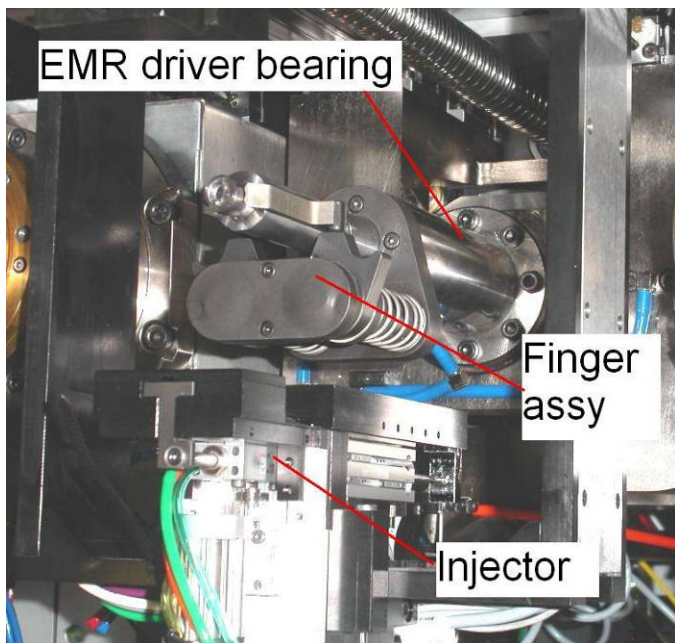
SA2 rivet finger mechanism and injector on EMR.
